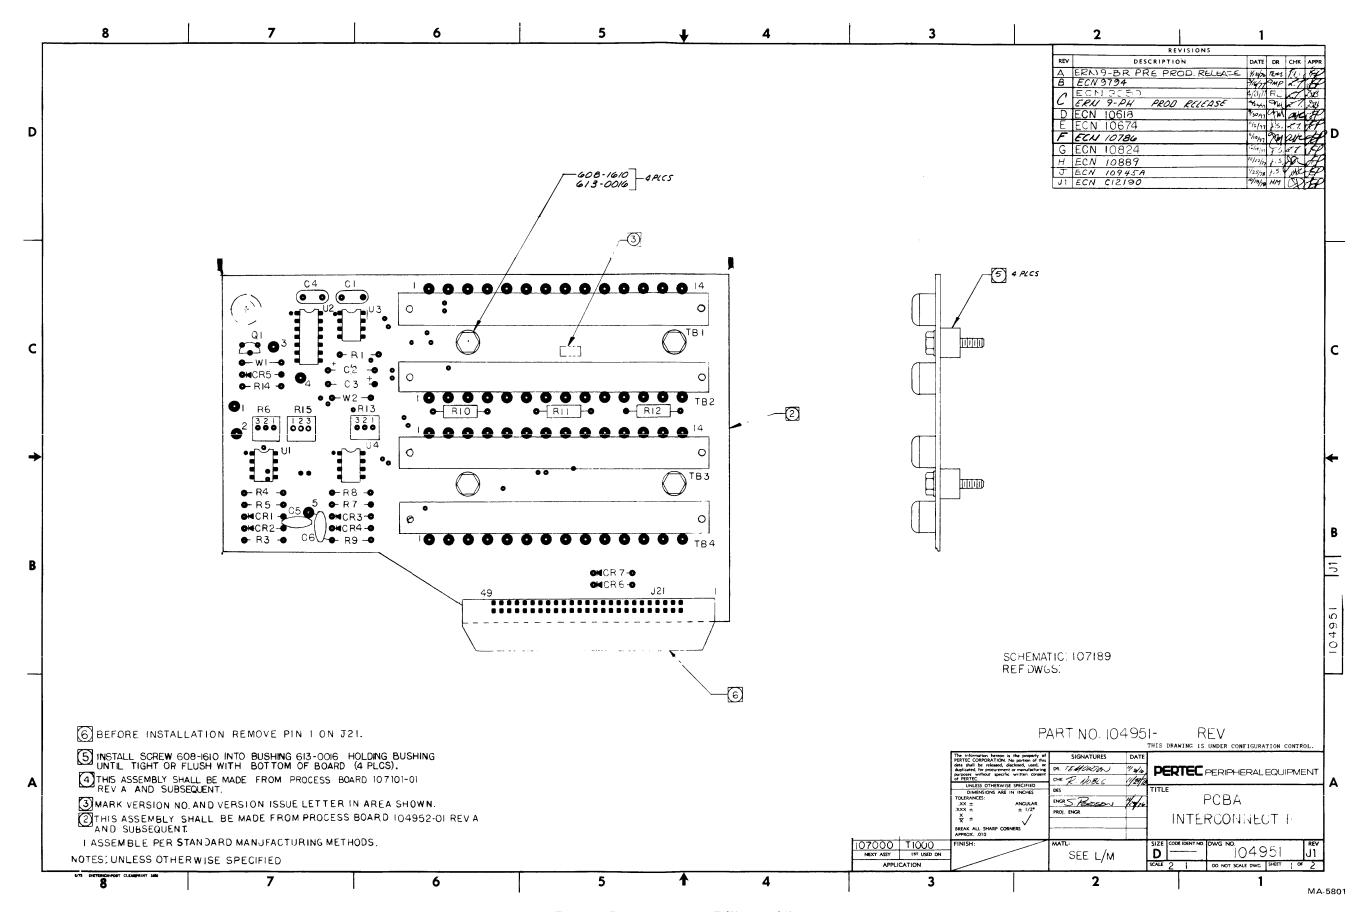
PCBA, Interconnect F (Sheet 1 of 2)
